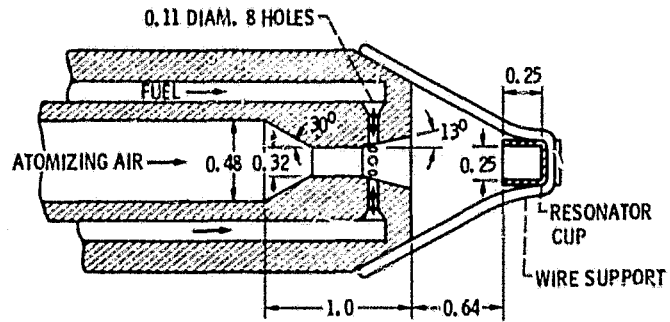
Sonicore fuel injector (Dimensions in cm).
